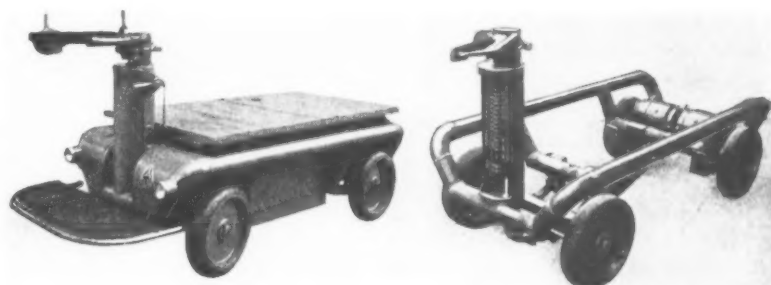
Small Electric Truck with Welded Tubular Frame
